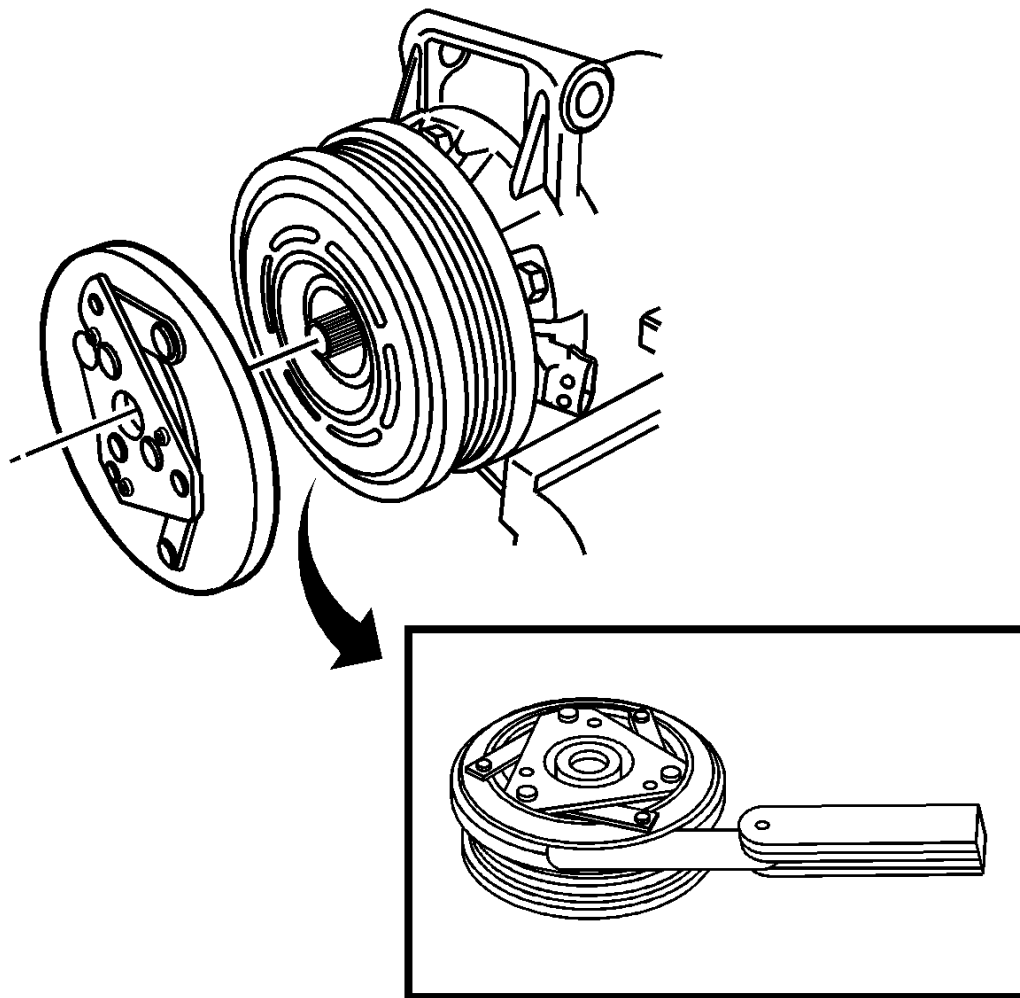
Air Conditioning Clutch Drive Plate Adjustment
